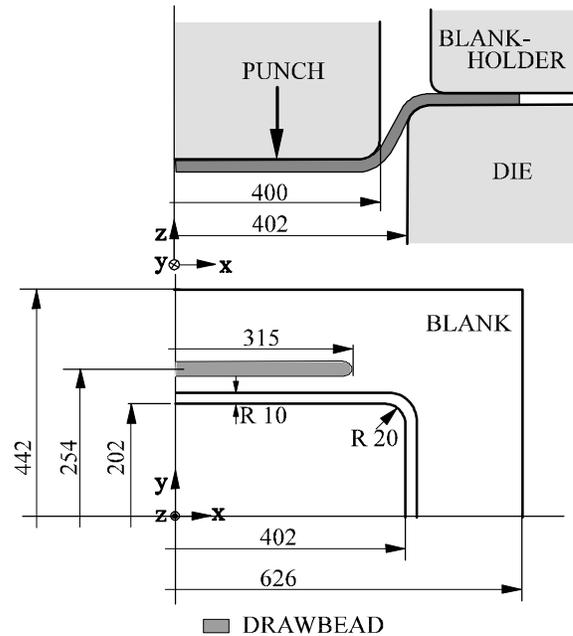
BLANK AND TOOL GEOMETRY OF THE RECTANGULAR PRODUCT
